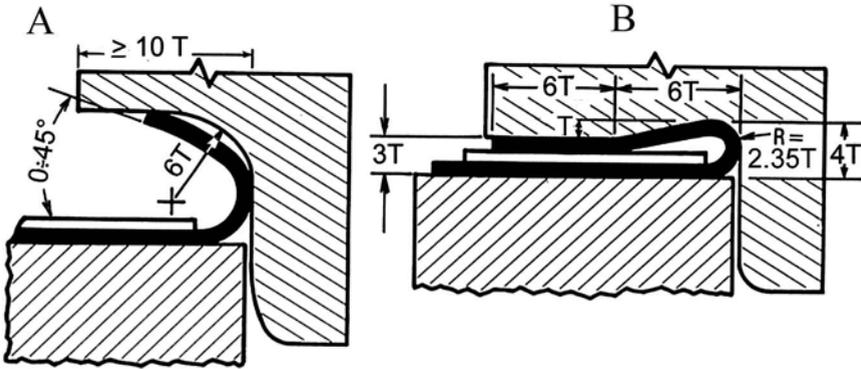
Dimensional rules for aluminum 2000 and 6000 hem tool design, to avoid cracks while hemming: preform hem operation (A); final hem operation (B).
